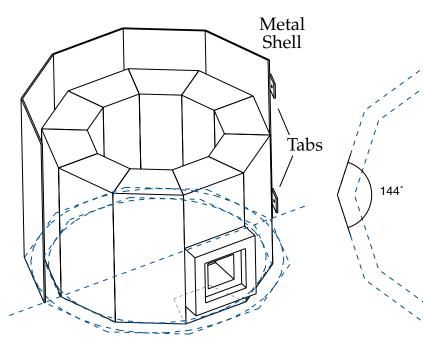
Begin assembly of the glory hole by marking out a pattern on the work-bench. Place the liner bricks including the burner block on the design. Leave a one inch space around the liner bricks for fiber blanket insulation. Bend the sheet metal to fit the drawing. Finally rivet tabs onto the shell sections and after installing the blanket insulation, screw the two shell sections together.
